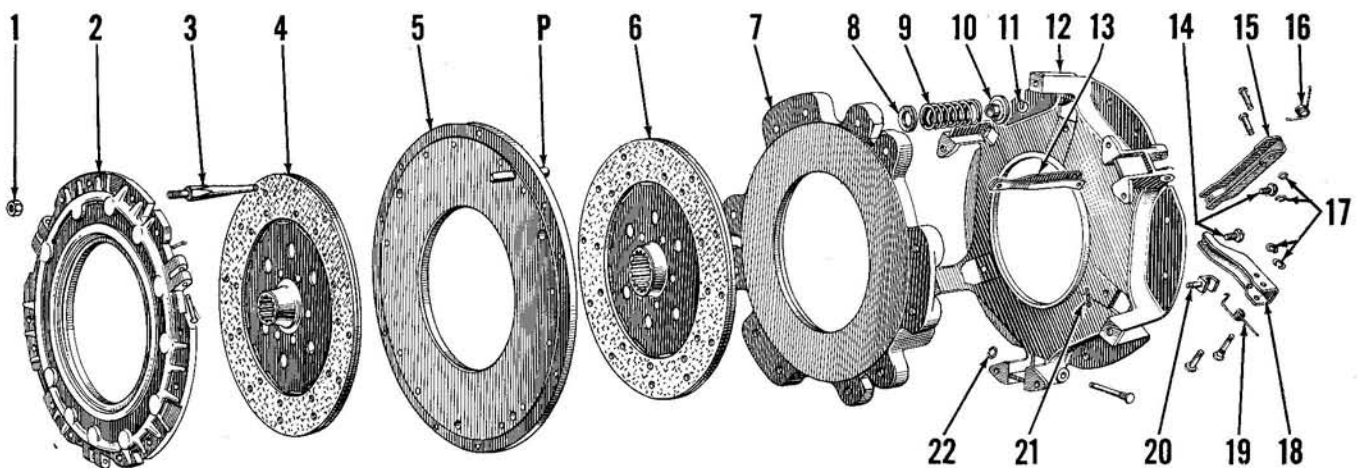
Exploded view of typical dual ("live PTO") clutch assembly. When servicing unit, be sure that pins (P) are securely fastened in center plate (5).
